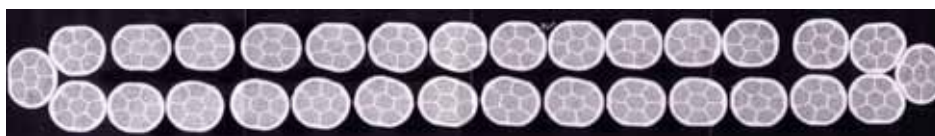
Sectional view of Rutherford-type compression molded conductor
